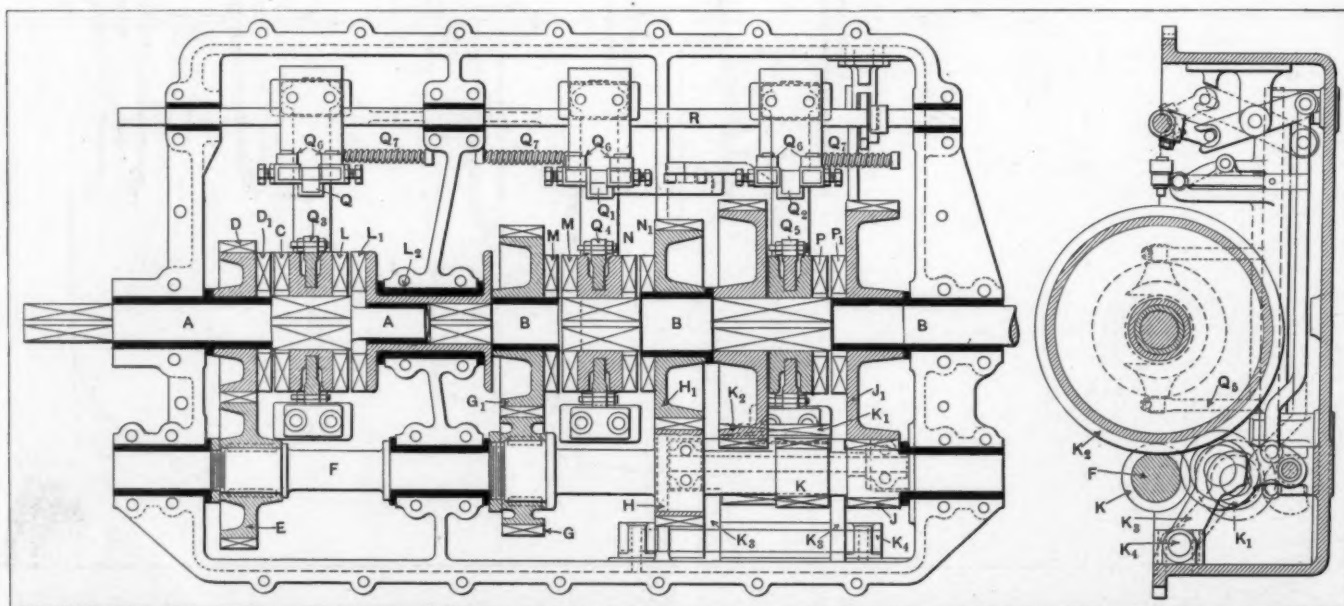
General arrangement and part end section of the four-speed jaw-clutch gear box, with the gears in the neutral position
